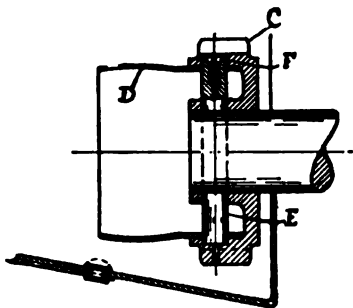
Method of mounting driving gear and fan pulley on crankshaft
